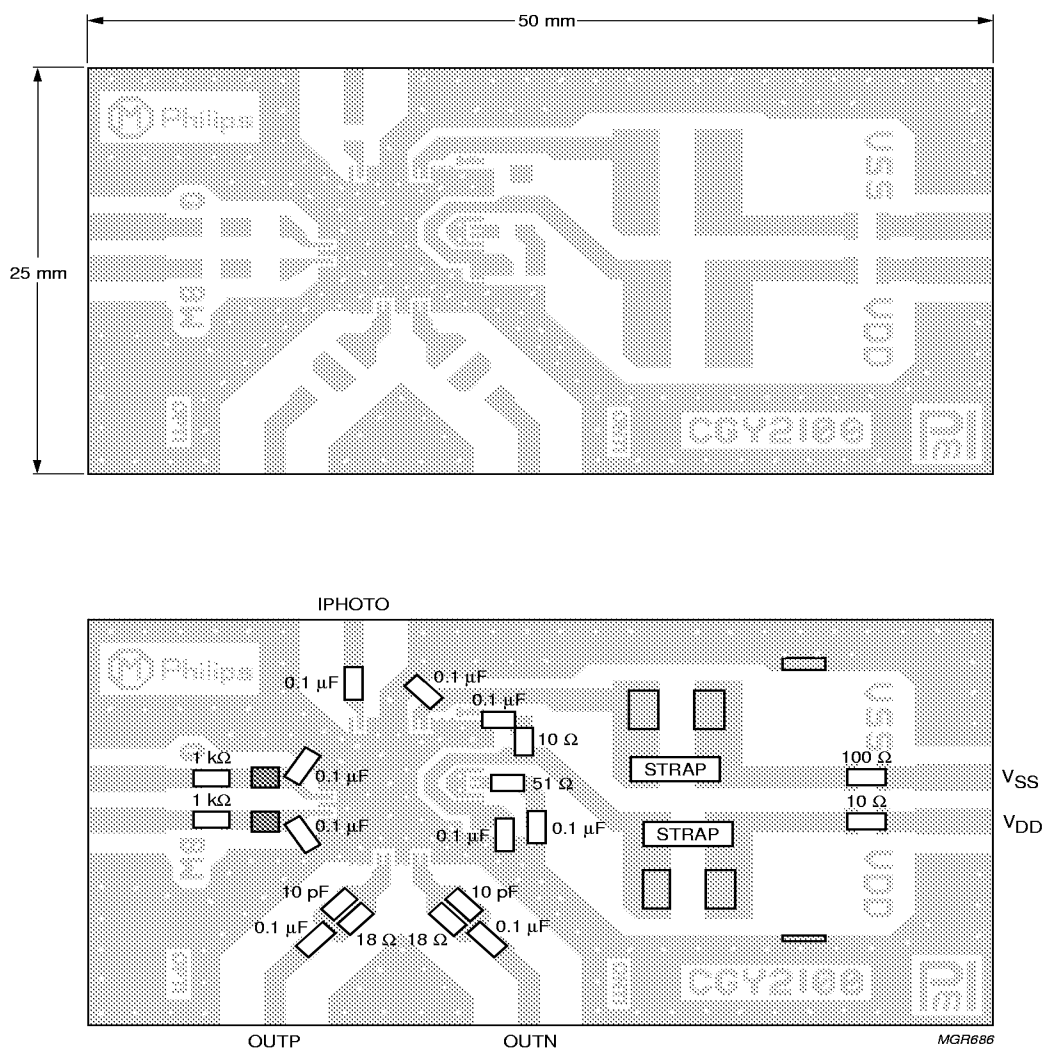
PCB layout of the CGY2100HL demonstration board (2.5 × 5 mm<sup>2</sup>).
